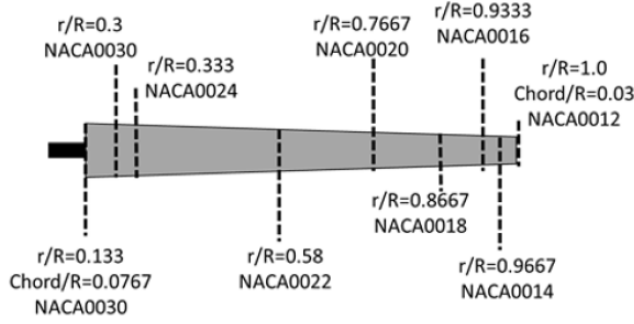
Blade planform of Harrington Rotor 1 (Ref. 2)
